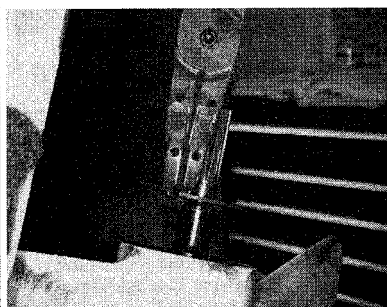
Use a pair of snapping pliers to carefully remove the rings...
